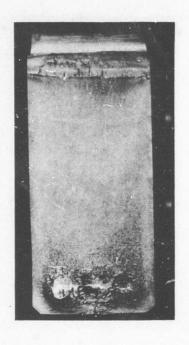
Photomicrograph of Surface of Failure of Tooth From Test Gear.
